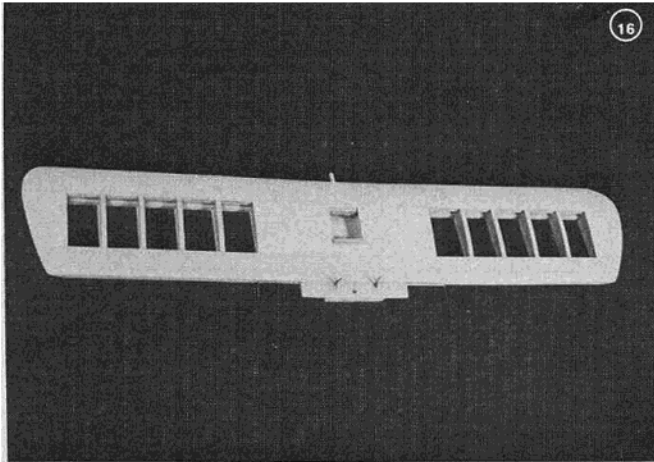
View of angled wingtip sheeting. Figure 16: Bottom wing with aileron rods installed. Note slight dihedral. Top wing is flat. Note wing dowel and hole for rear hold-down bolt. Figure 17: Bottom view of lower wing. Quarter inch sheet center section fairs wing to bottom of fuselage. Figure 18: Close-up of lower wing center section details. Figure 19: Lower wing tip detail. Sand end of ailerons to fair into tip angle. Figure 20: Yellow heat shrink tubing installed on landing gear after covering is completed. Figure 21: Lower hatch removed to show wrapped battery pack.
